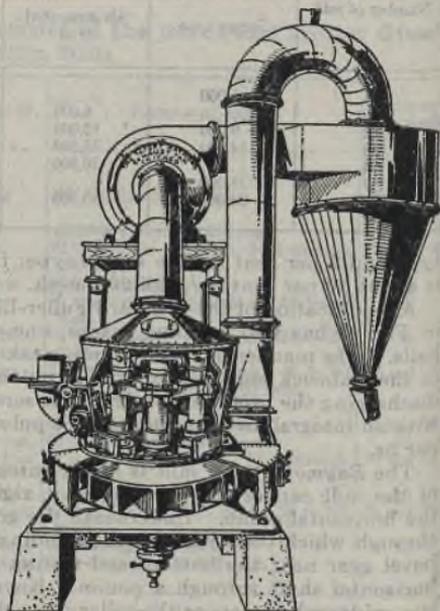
Raymond low-side five-roller mill with low-side separator and dust conveying and collecting system.
